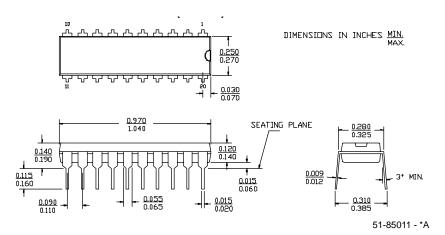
20-Lead (300-Mil) Molded DIP
